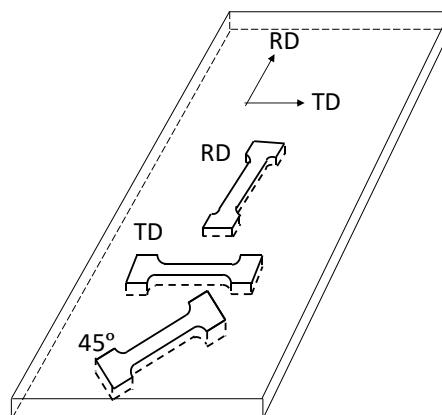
Schematic drawing of how the directional samples are cut out from steel sheet.
